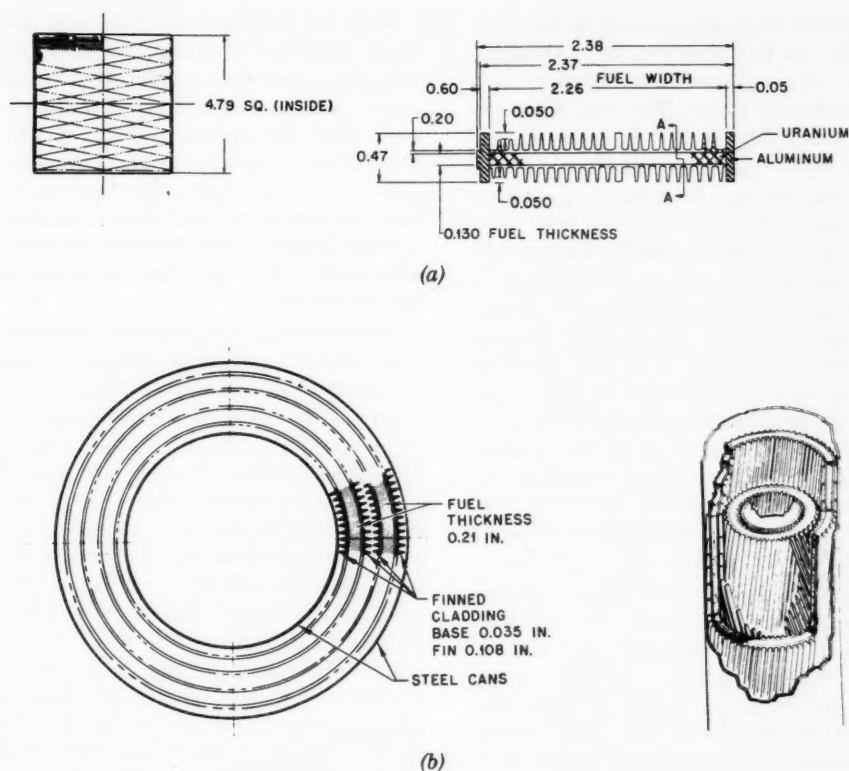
OMR fuel assemblies.³ (a) Plate type assembly. (b) Double-annular assembly.
